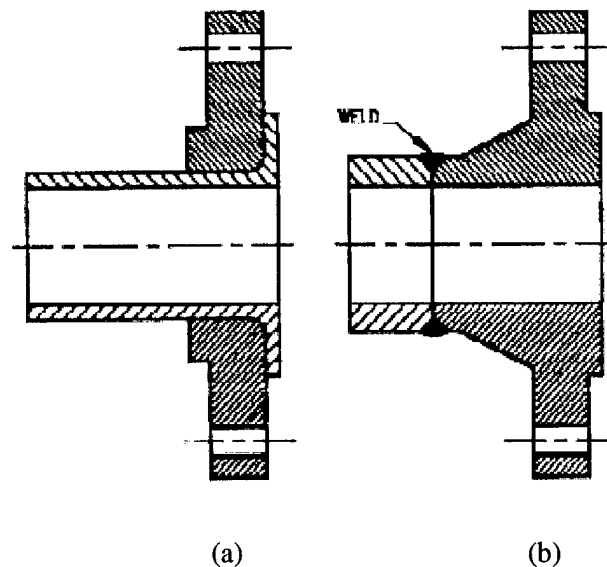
Type A stub end (a) and welding neck flanges (b).
